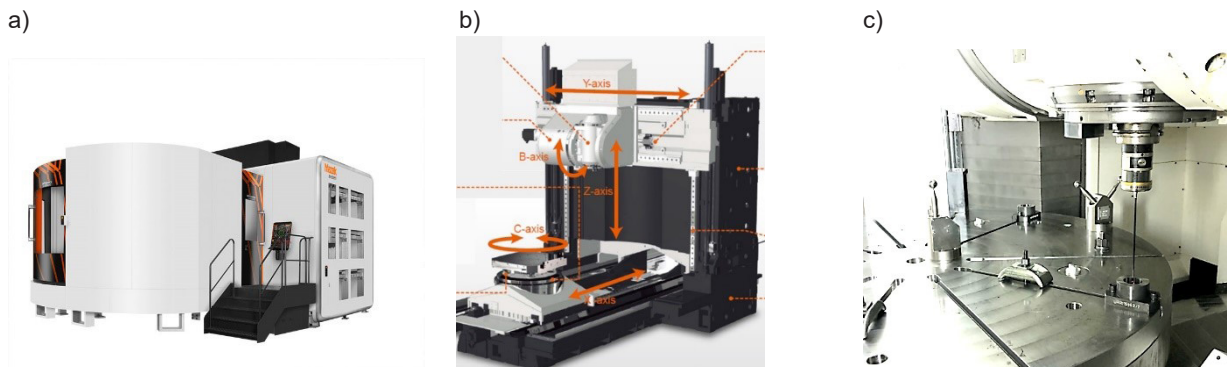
Mazak Integrex e-1600V 5-axis multi-task machining center:
